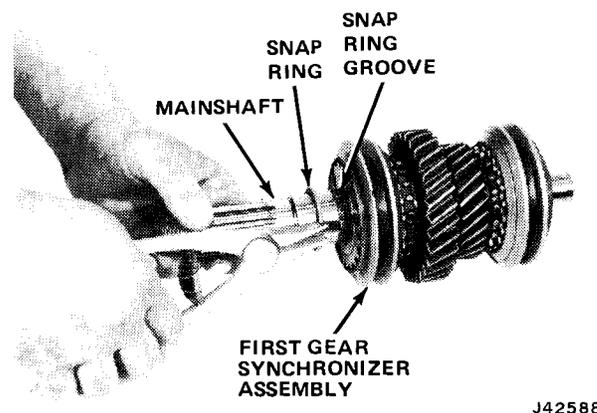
First Gear Synchronizer Hub Snap Ring Removal—Installation
